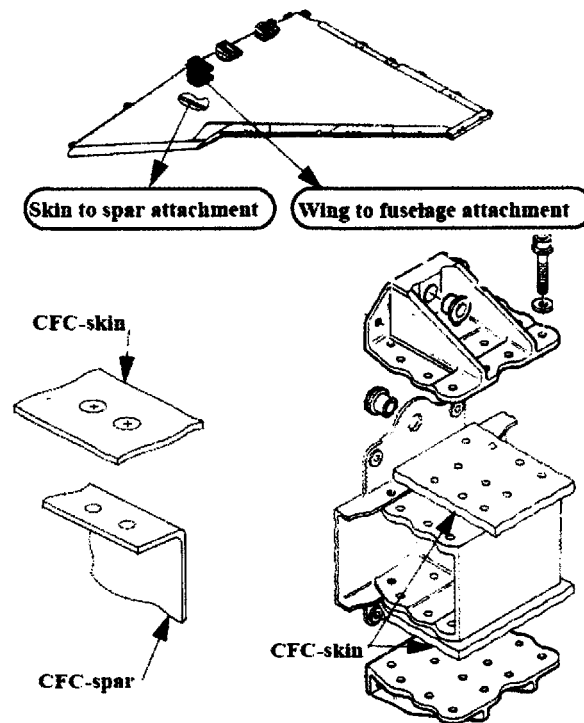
Bolted Joint in Wing structure (Ref. 5-1)
